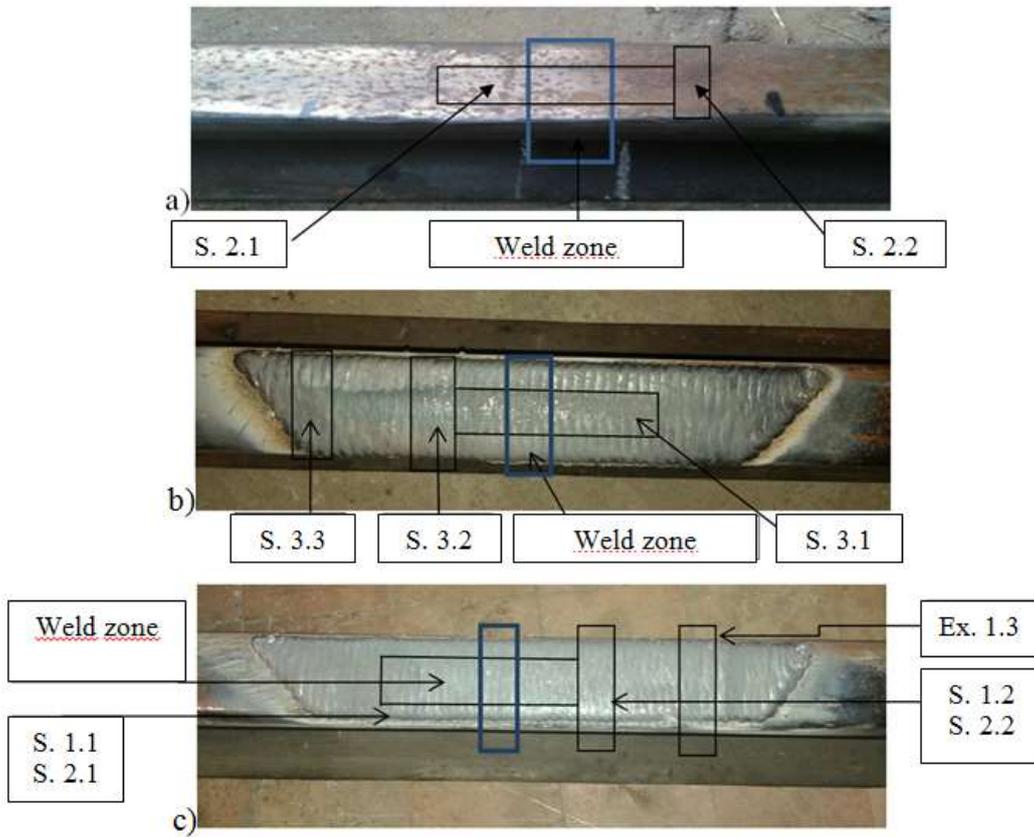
Cutting scheme of samples extracted from contact-welded joint of rails: a) rail #1 without surfacing; b) rail #2 with single-layer surfacing; c) rail #3 with two-layers surfacing.
